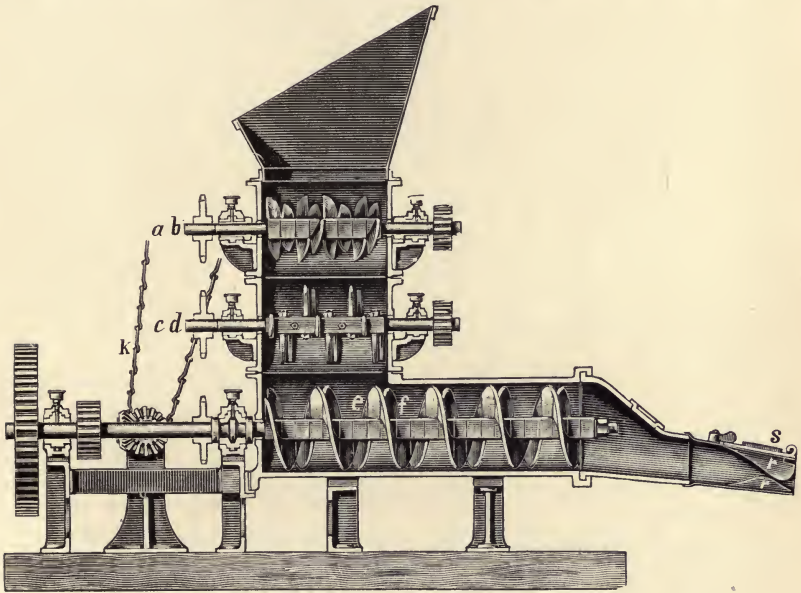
Heinen's Peat Tearing and Mixing Machine. (Side Section.)
